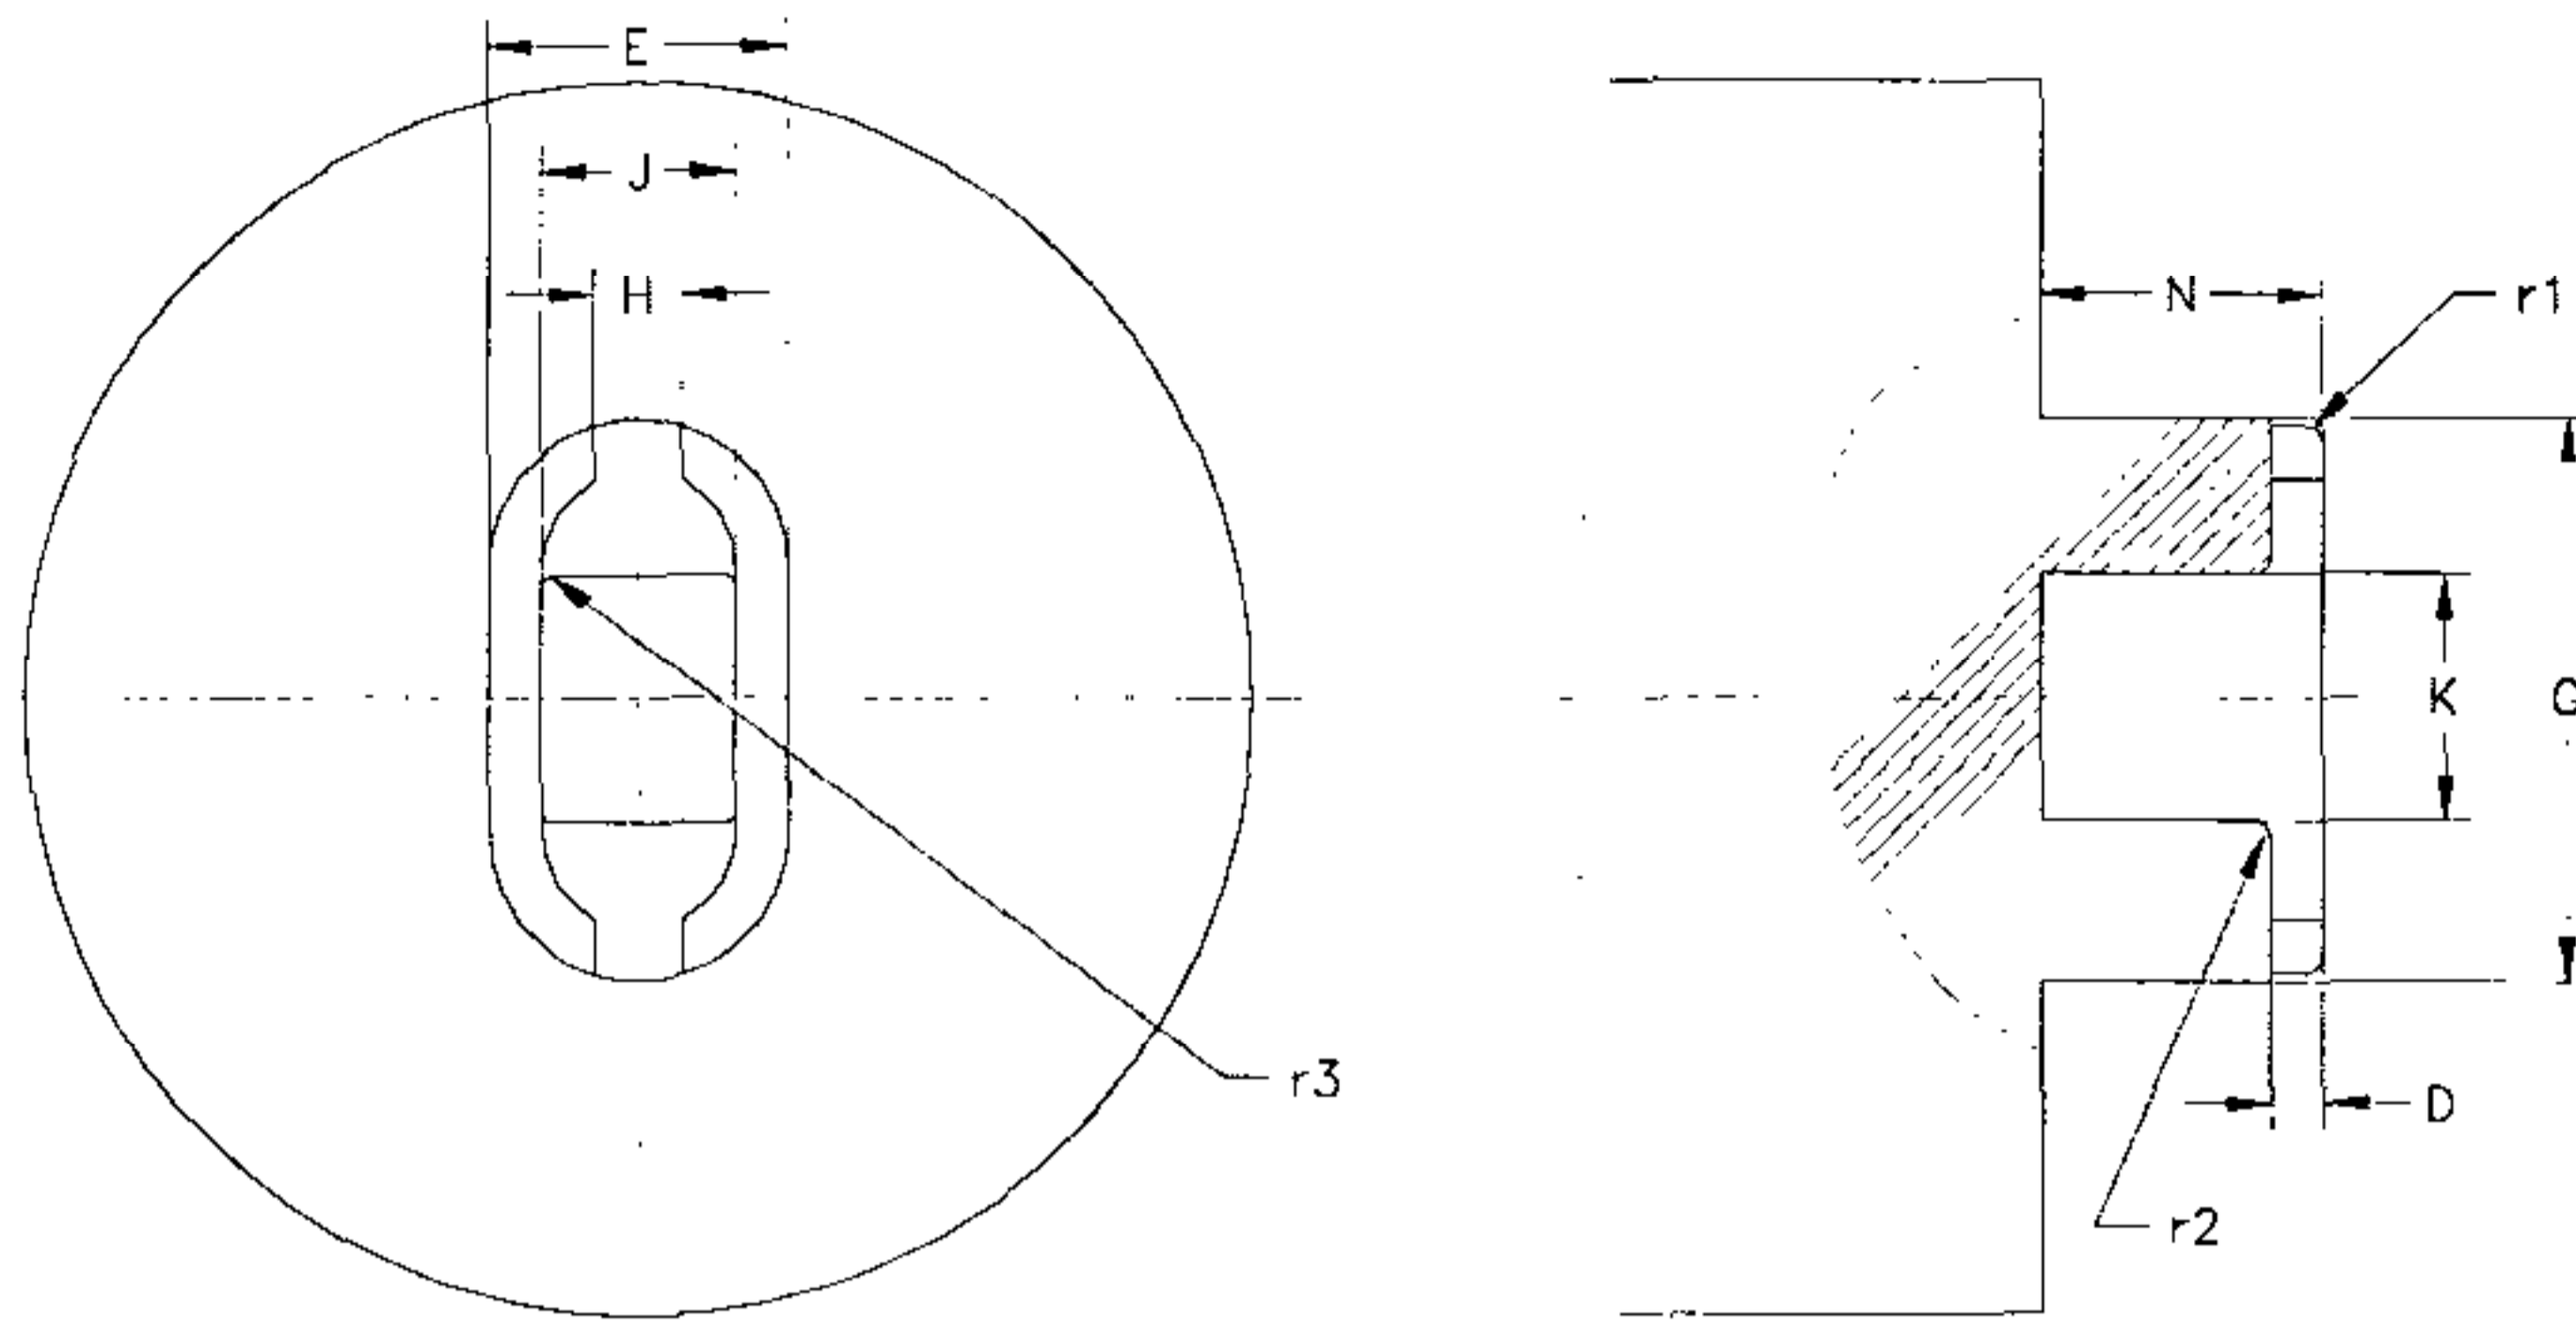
Test cap for the test of clause 13 for lampholders Fa8
